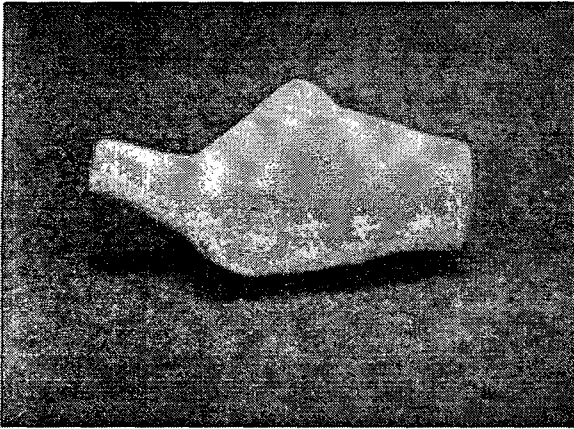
Finished 3D thin-walled products after ultrasonic welding (ABS)
